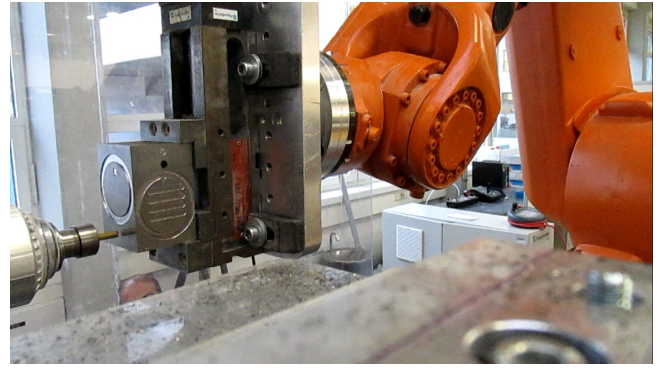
Setup for machining with spindle and mounted force/torque sensor
